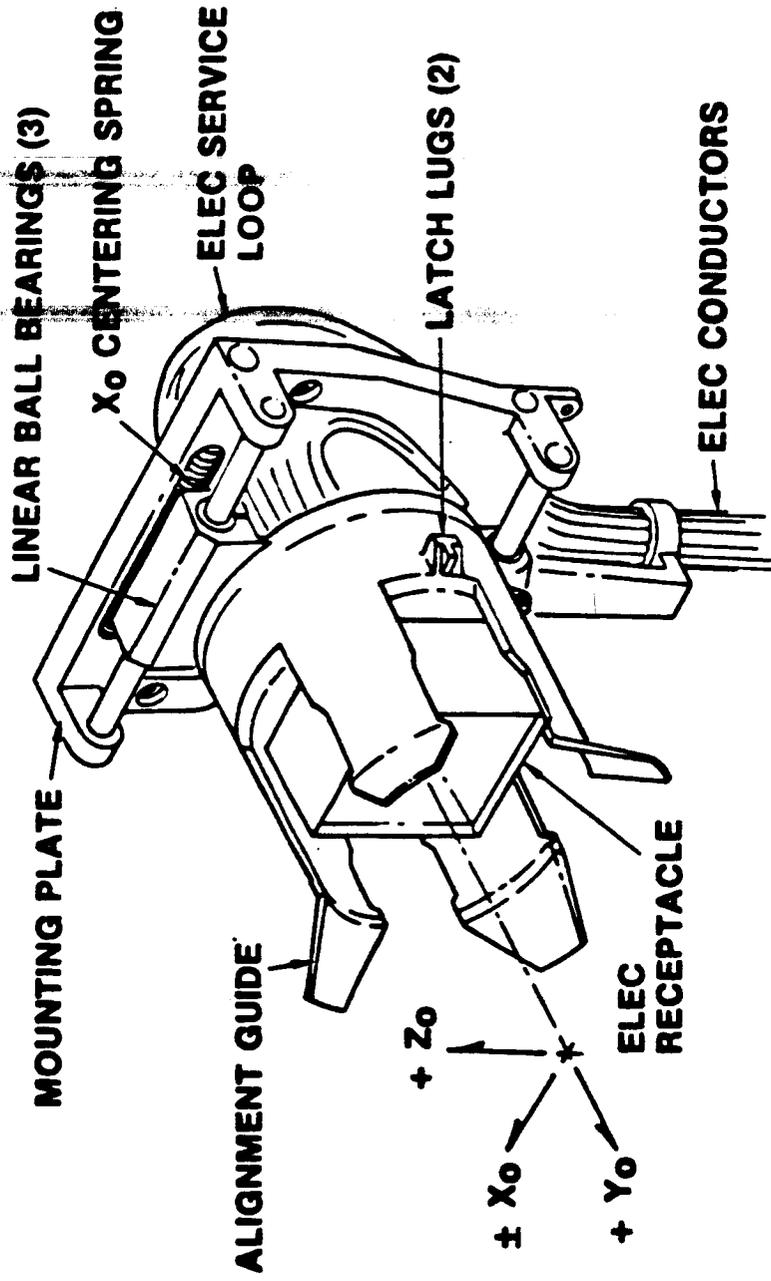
PAYLOAD DISCONNECT ASSEMBLY
